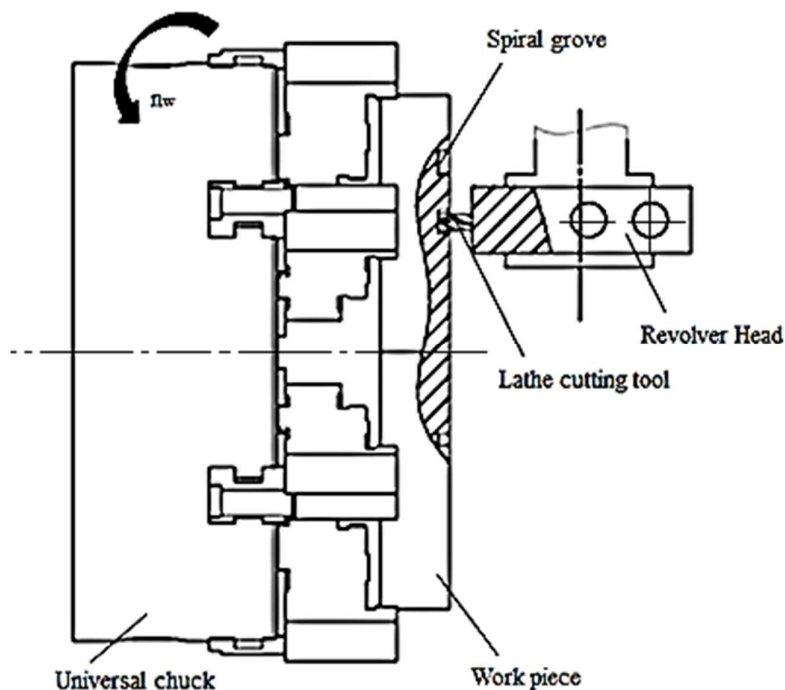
Machining a spiral groove on the flat surface of a disc-type workpiece using a lathe tool located and clamped in a revolver head on a CNC lathe.
